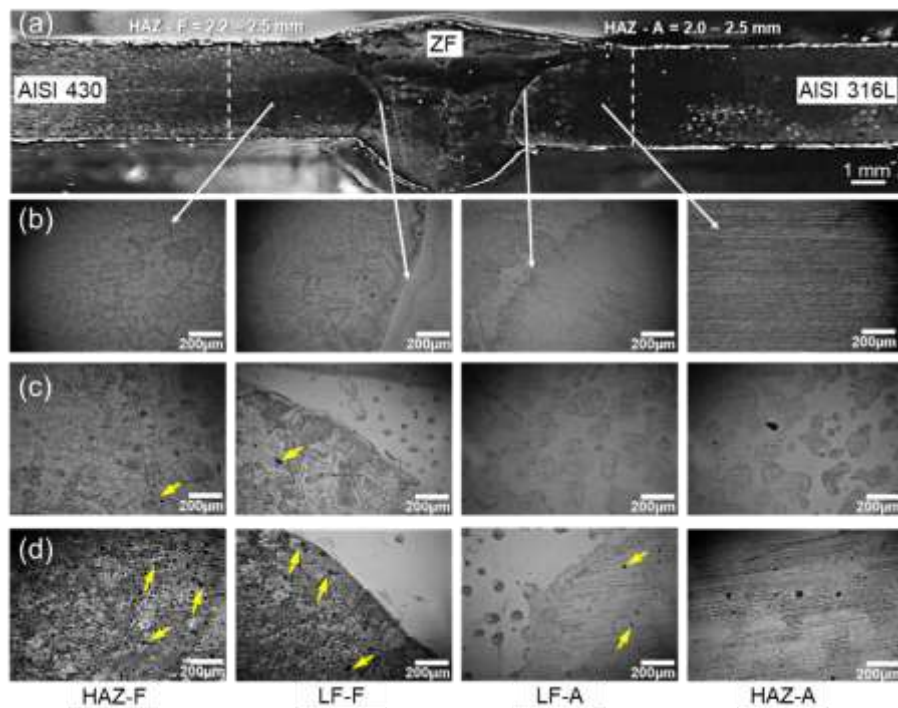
a) Welded joint of GB specimens, b) Non-immersed GB specimen, c) 24 hours immersed GB specimen, and d) 72 hours immersed GB specimen. HAZ-F: heat-affected zone on the ferritic side, LF-F: fusion line on the ferritic side, LF-A: fusion line on the austenitic side, HAZ-A: heat-affected zone on the austenitic side
